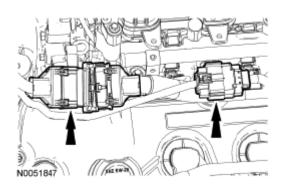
Locating Fuel Hose Routing Clip Courtesy of FORD MOTOR CO.
